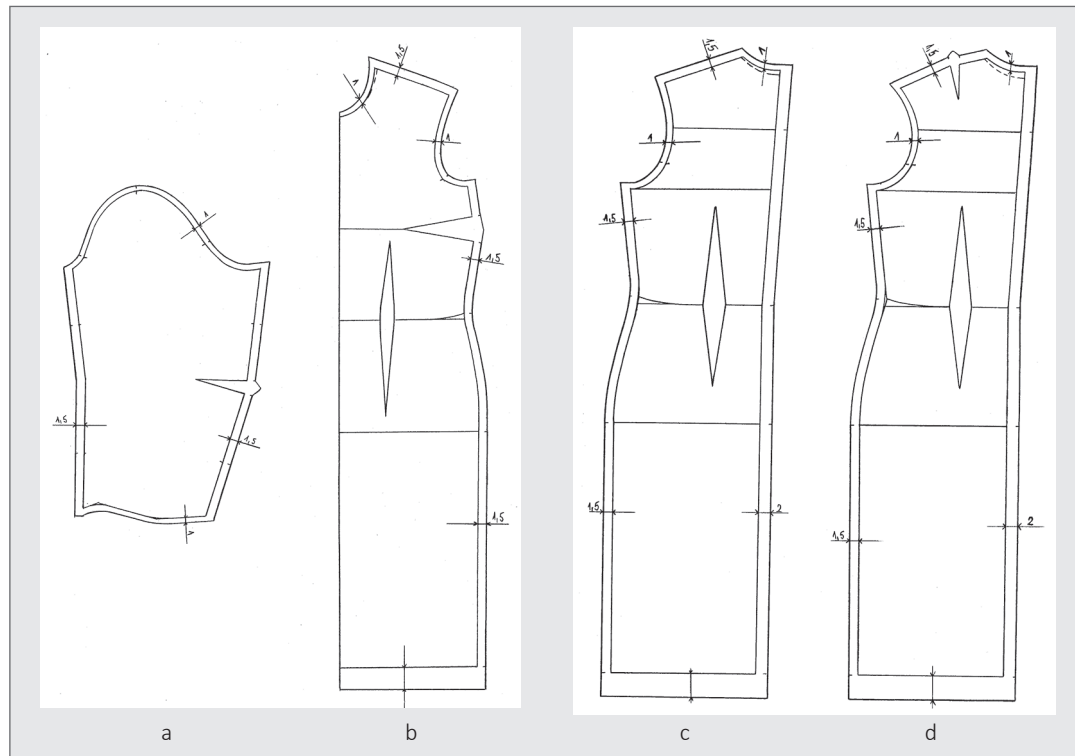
New basic dress pattern parts with seam: a) sleeve; b) front part; c) back part without shoulder dart; d) back part with shoulder dart
